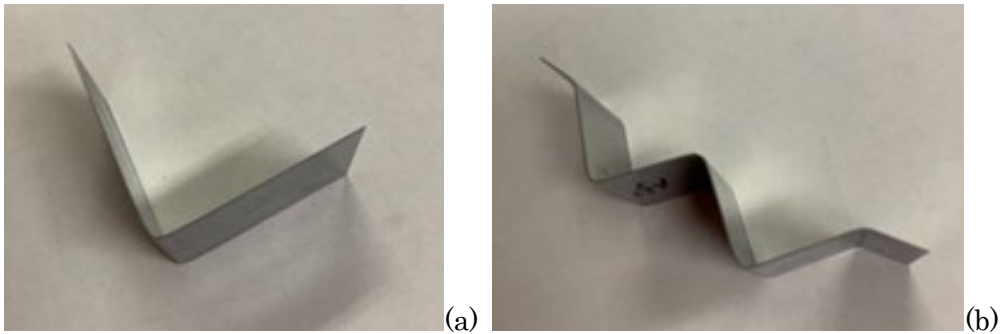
A specimen after bending, (a) V-bending and (b) wave bending
